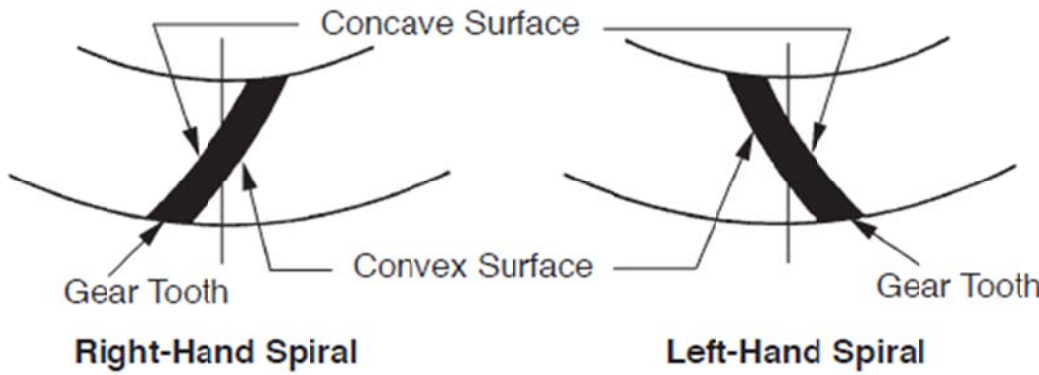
Convex Surface and Concave Surface of a Spiral Bevel Gear
